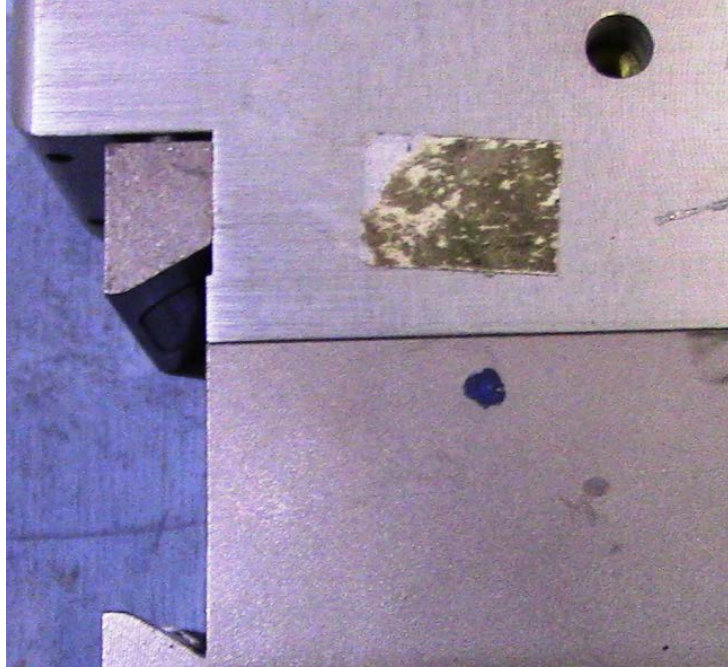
Close-up of male slit blade assembly built-in clamp [2]
